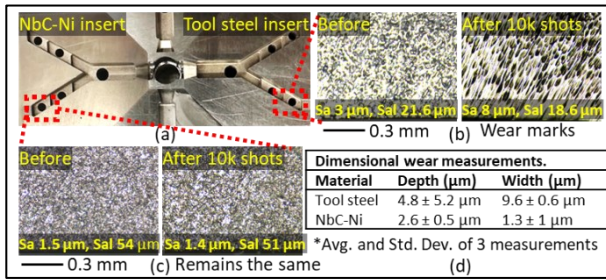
(a) Moulds inserts, surface topographies of (b) tool steel and (c) NbC-Ni cermet, and (d) dimensional wear measurements.
